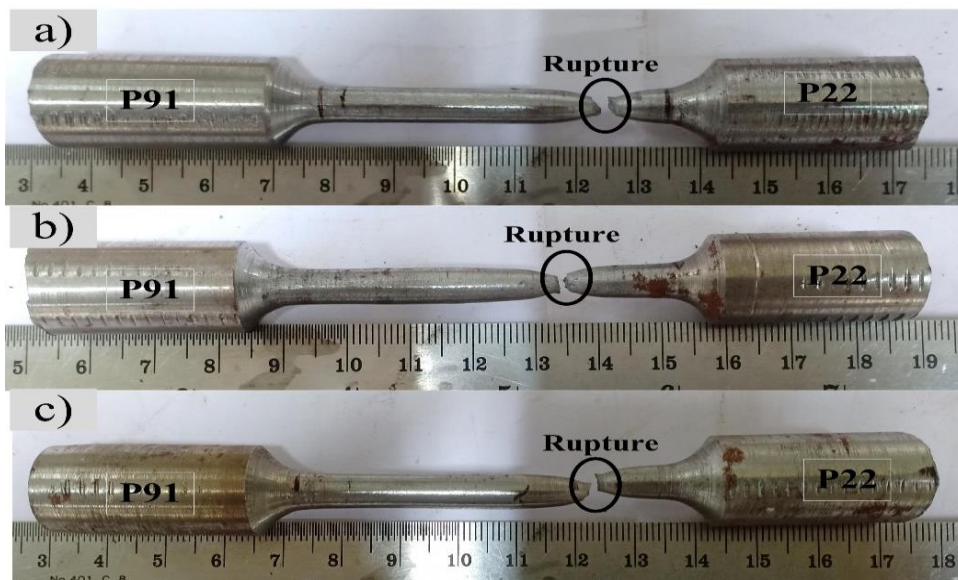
Fractured weld tensile test specimen fabricated using a) commercial electrode CE b) Electrode E2M c) Electrode E18M
